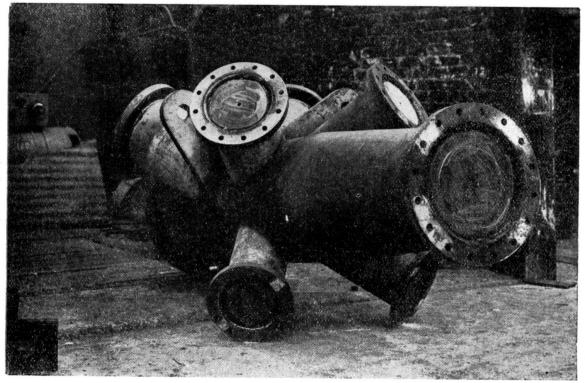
Junction piece ready for completion of welding on blanking-off plates
